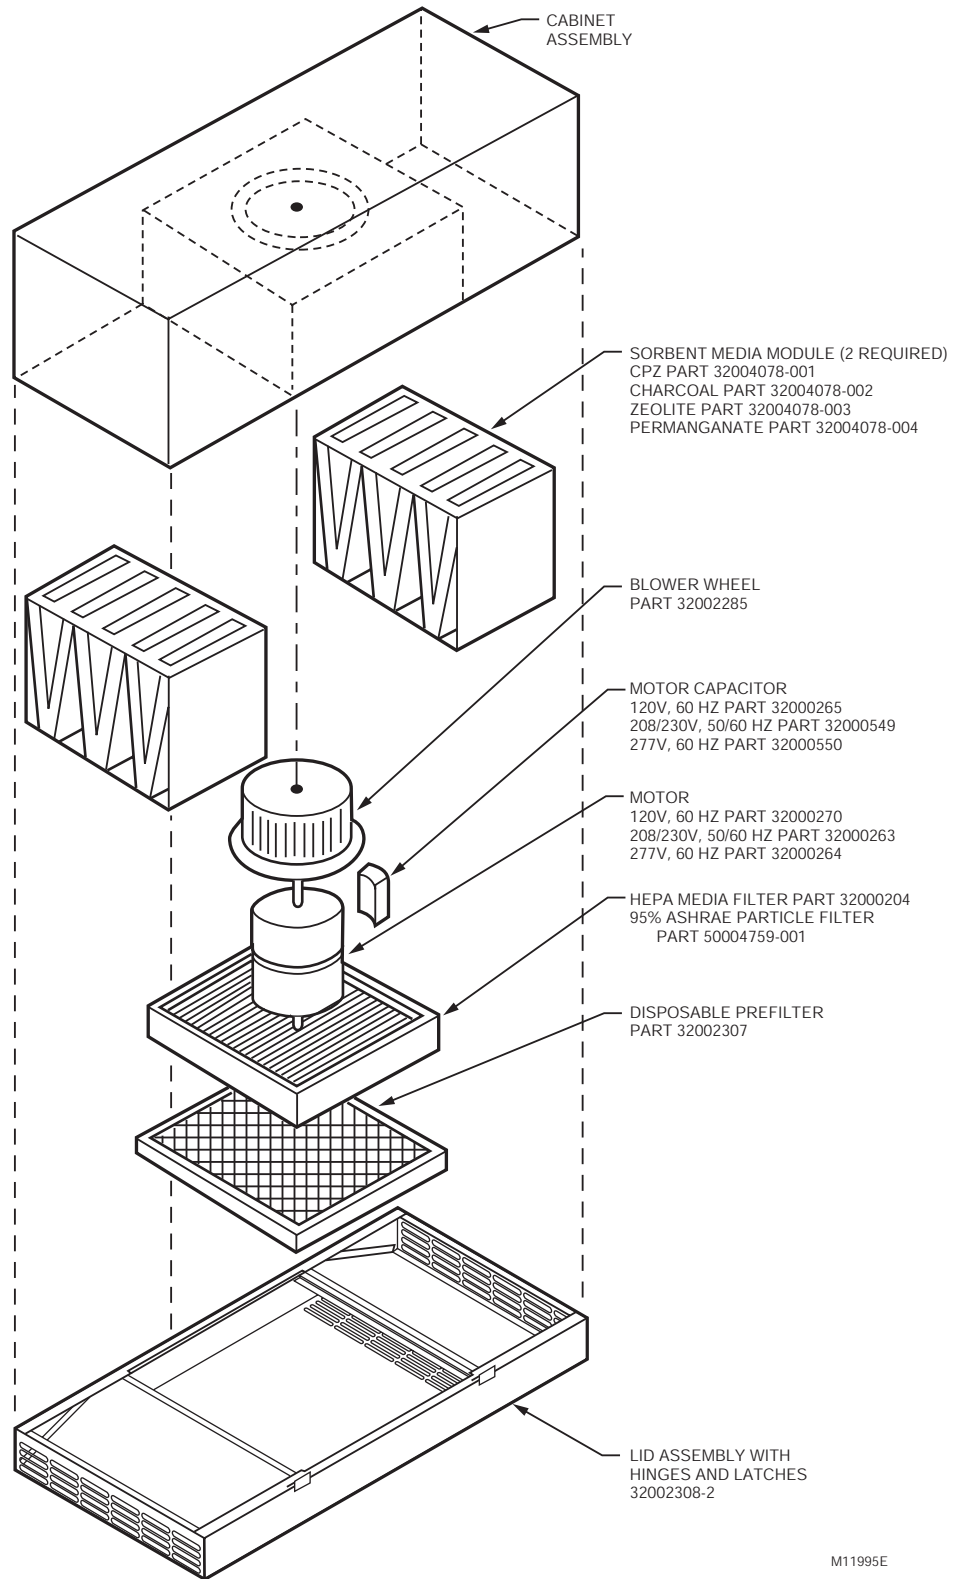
Exploded view of F111 (series 11000) in Ceiling Media Air Cleaner components.
